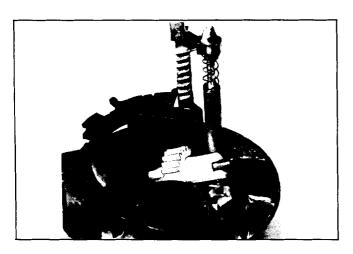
Removing or Installing Rack and Lock Bolt
